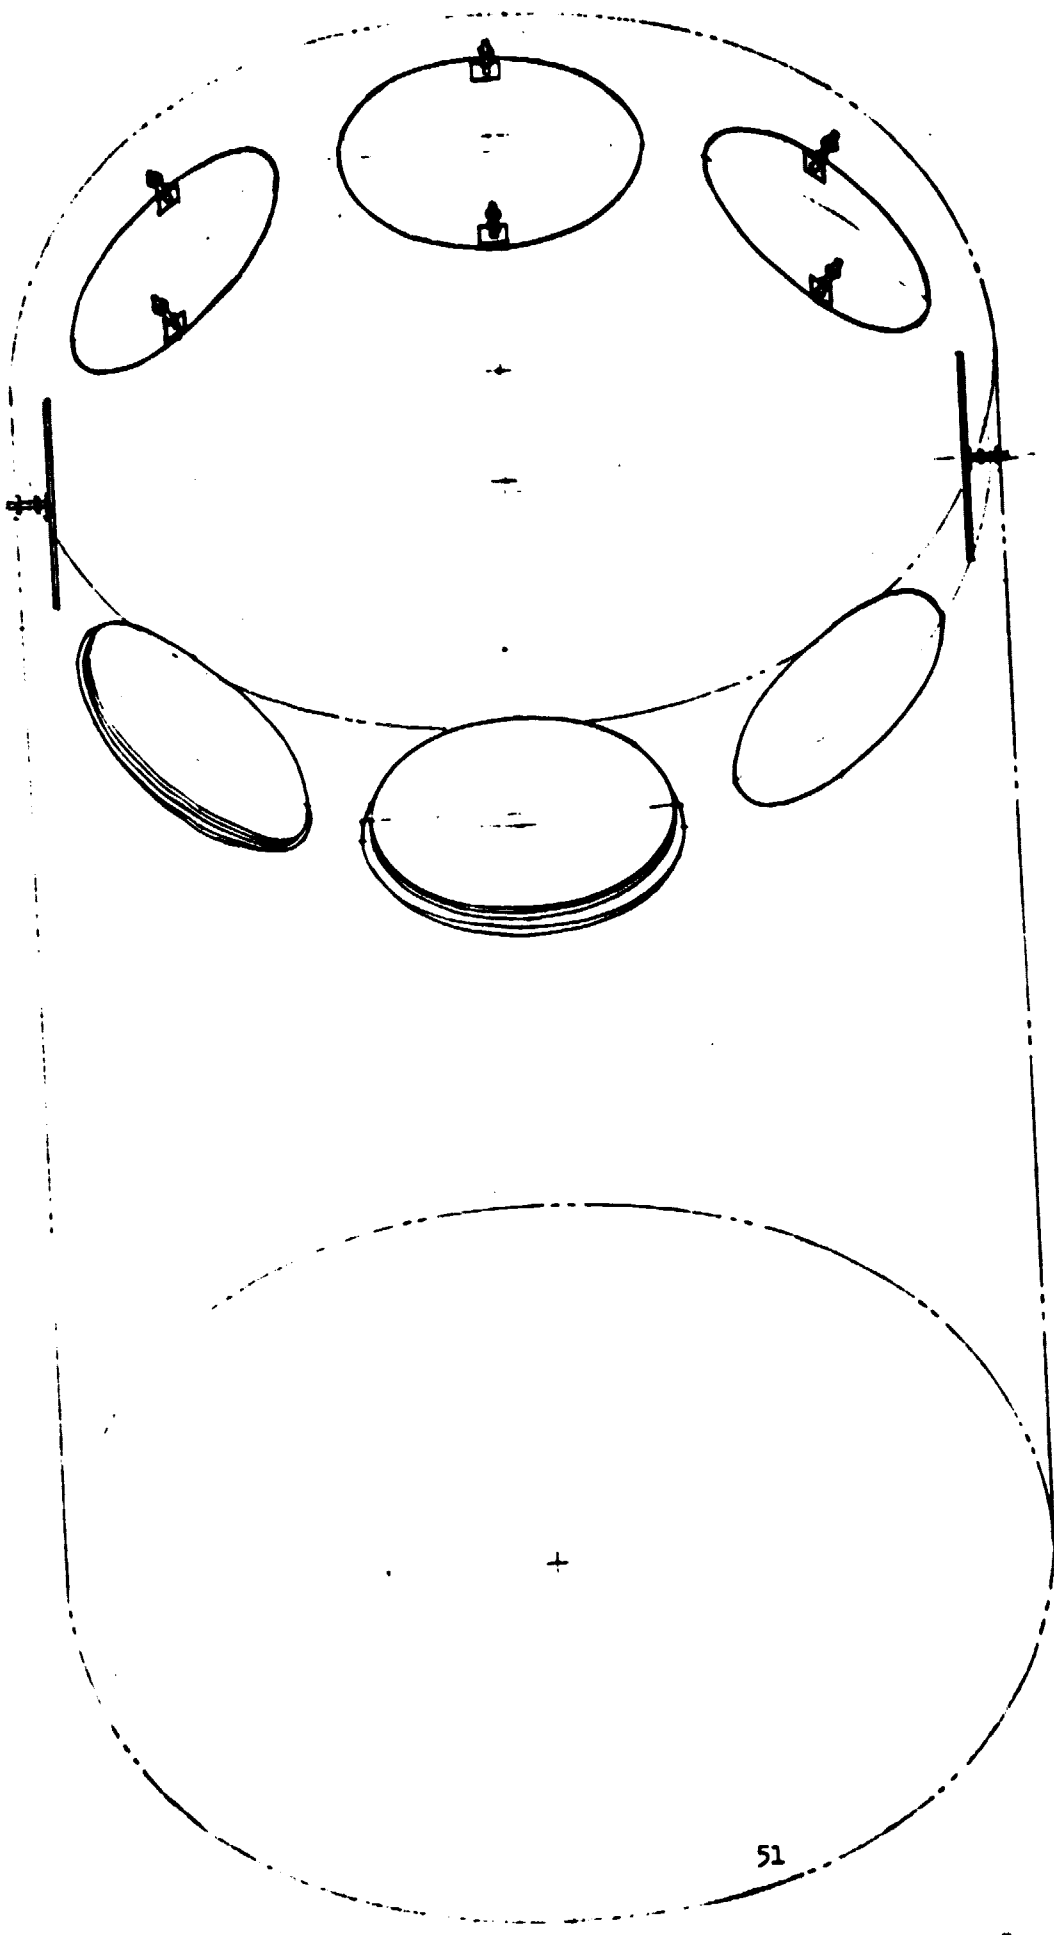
shows a cylindrical heat exchanger of the same type installed in the trapezoidal segmented MEC payload container. In this configuration, the specimen heat exchanger would also fit inside of the MEC system eight segmented cylindrical heat exchanger. The 33 inch outside diameter of the cylinder used to pressurize the heat exchanger just fits adjacent to the bottom and two sides of the payload container.
